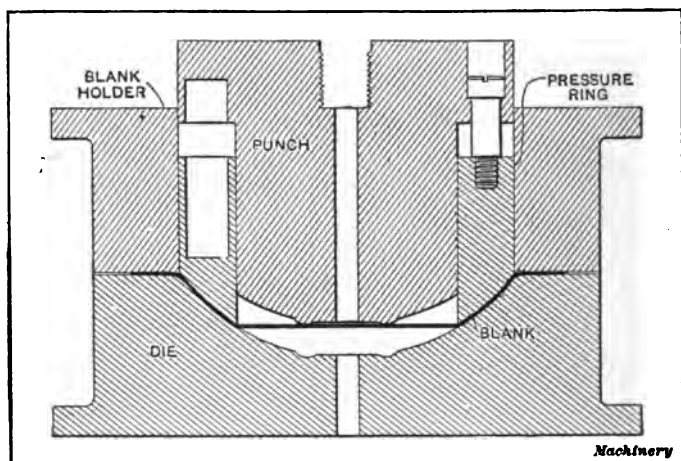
First Step in the Operation, the Pressure Ring drawing the Blank to the Form shown in Middle View, Fig. 25
